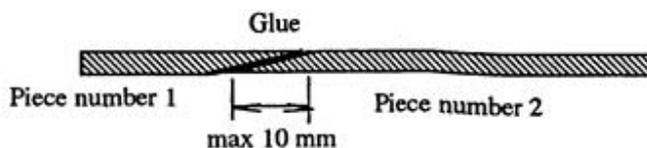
Spliced Joint - a stronger joint than a butt joint.
